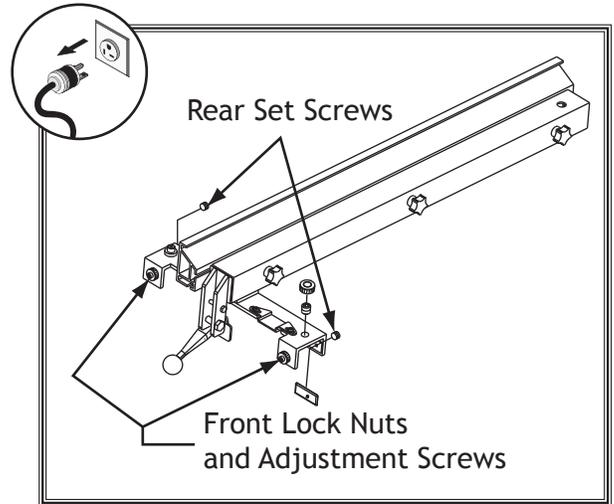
Location of screws used to adjust fence parallelism and clamping pressure.
